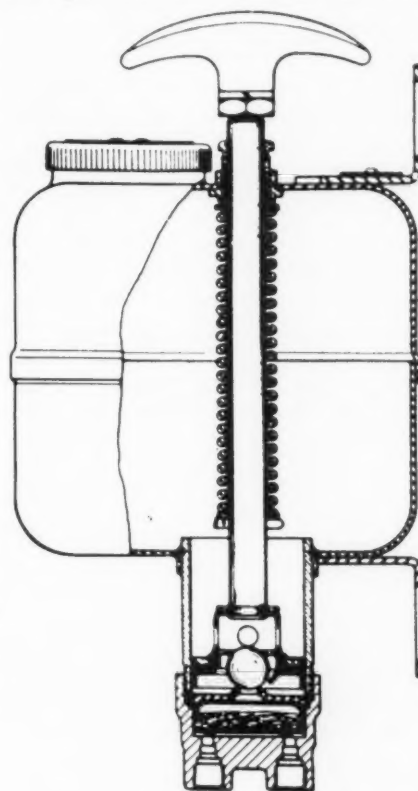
SECTIONAL VIEW OF BIJUR LUBRICATOR
